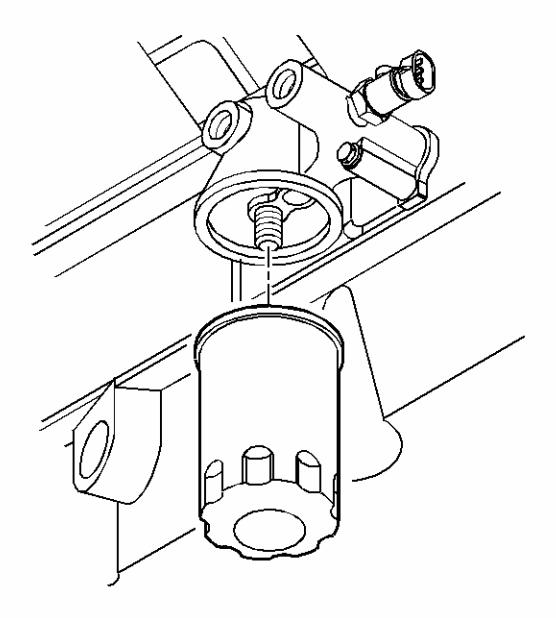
Locating Oil Filter Adapter & Filter Courtesy of GENERAL MOTORS CORP.
